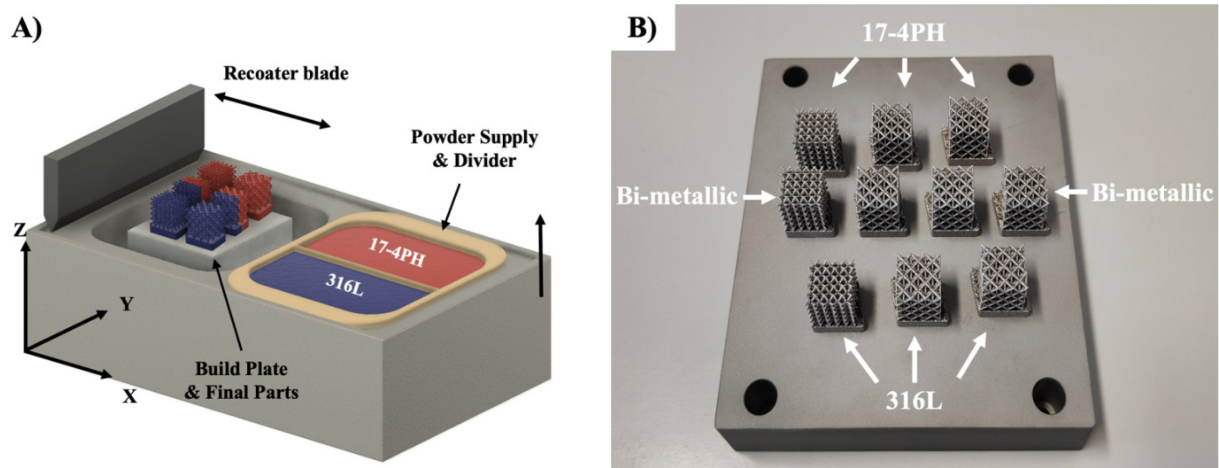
A) CAD diagram of the equipment used for the sample fabrication. B) Single & multi-material lattice structures after powder removal.
